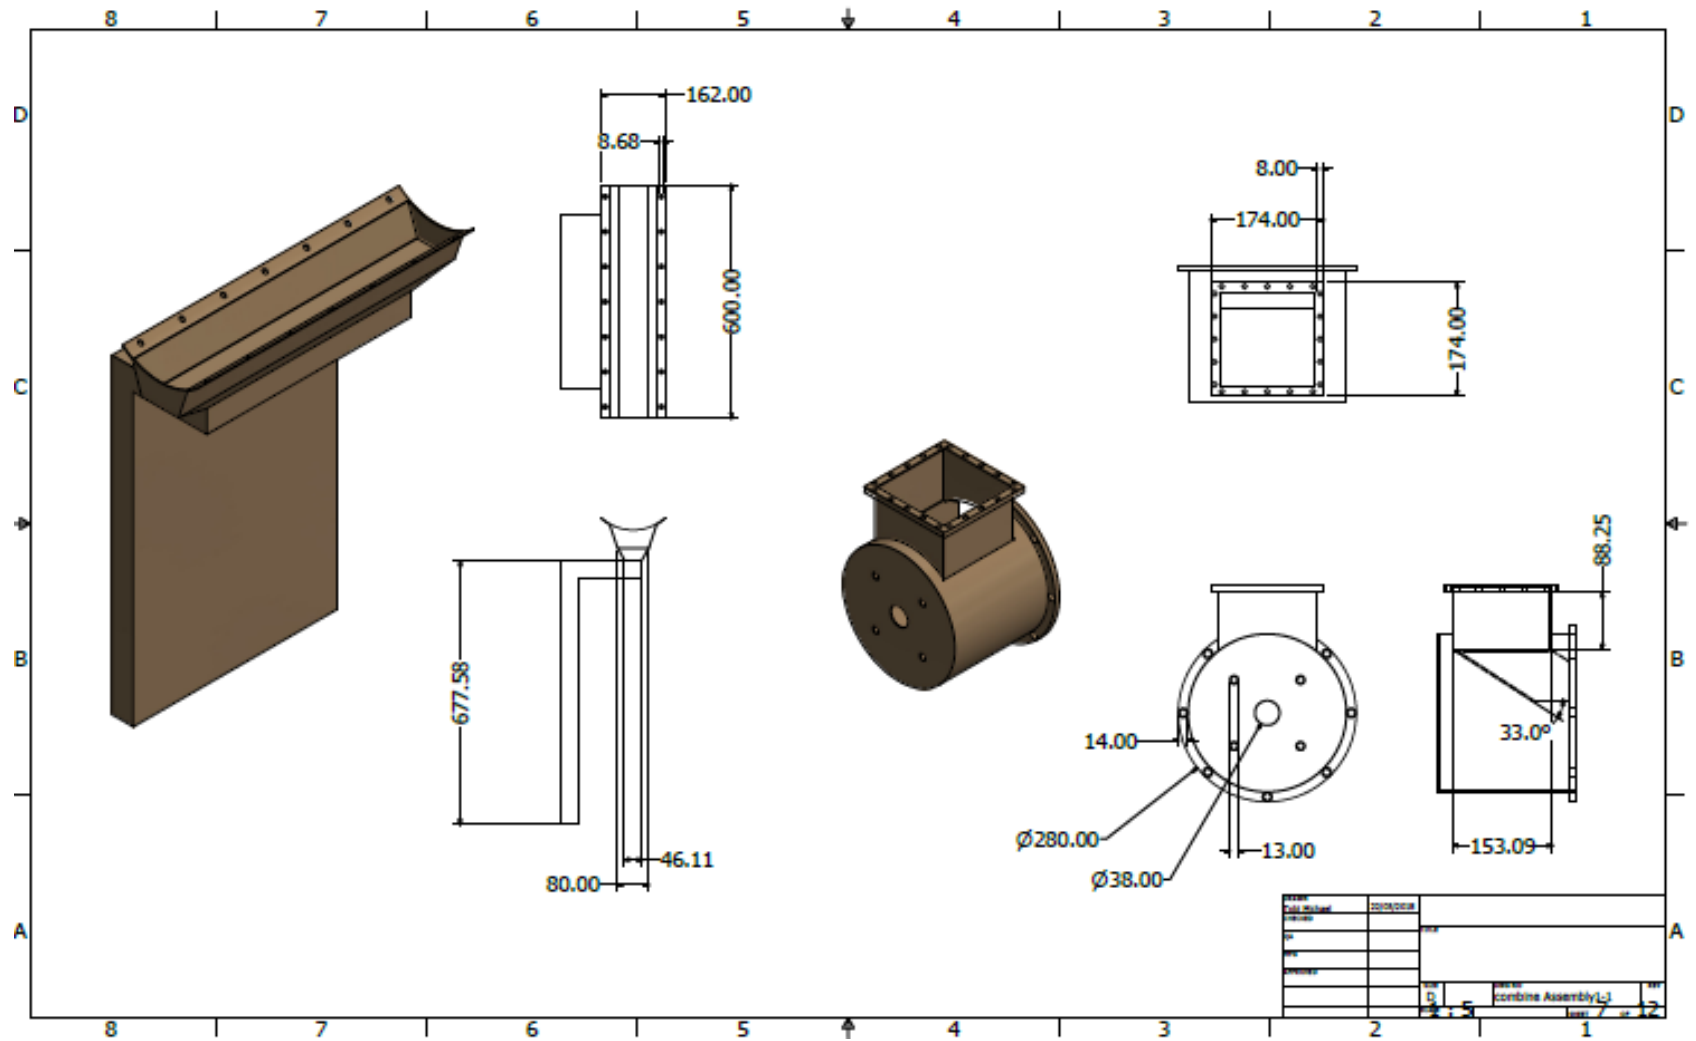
design drawing of second separating unit inlet and outlet for sand and dust
